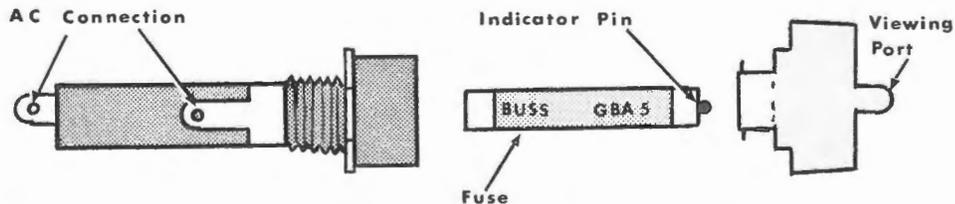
Indicating Fuse, Install Pin Toward Viewing Port
